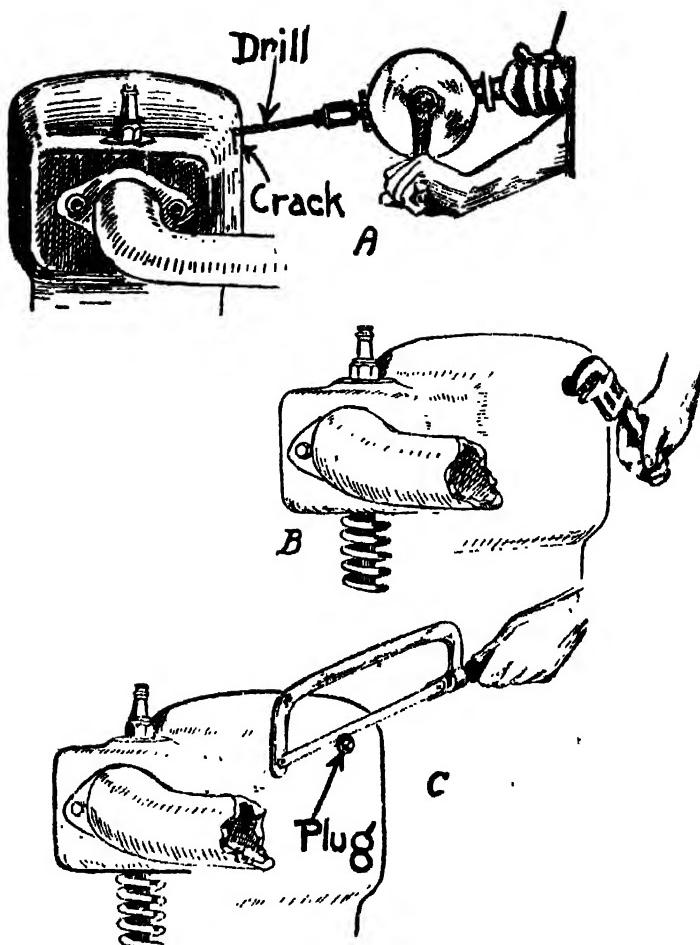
Method of Using Pipe Plug for Sealing Fine Cracks or Sand Holes in Cylinder Water Jacket.
